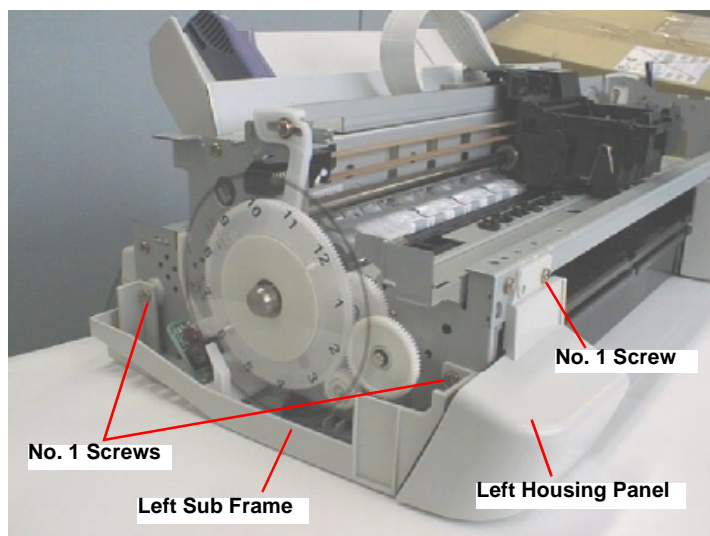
Removing the Left Housing Panel & Left Sub Frame
